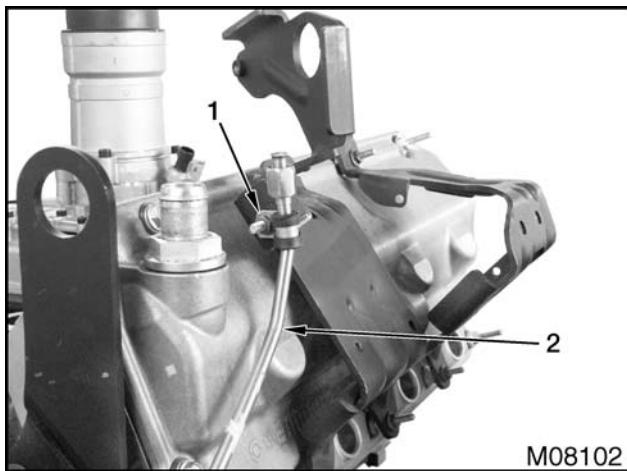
Exhaust Back Pressure (EBP) tube assembly
